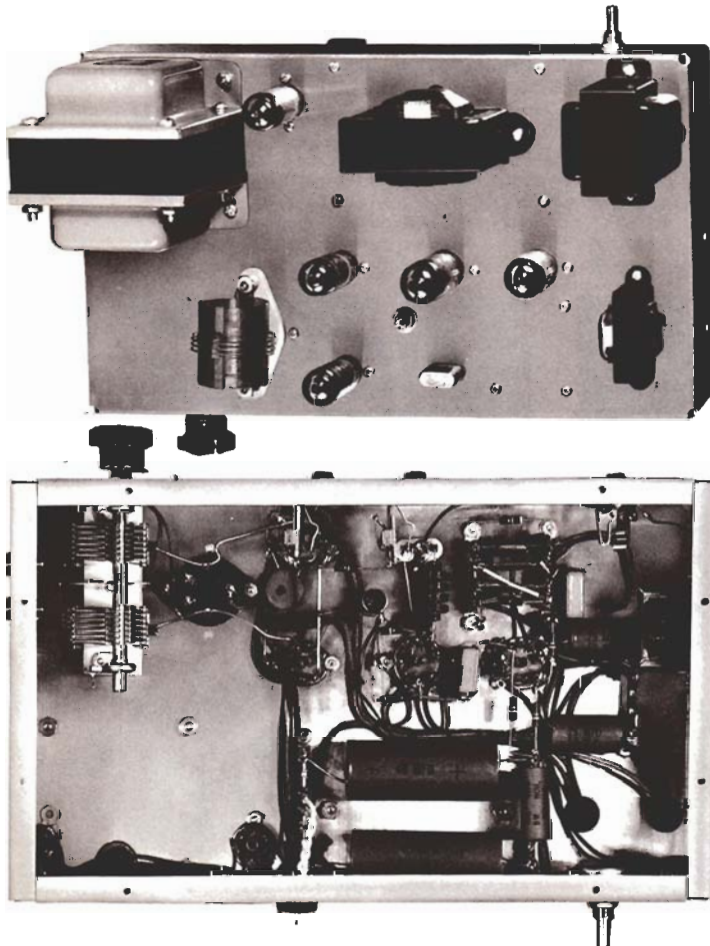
Top view of the double sideband transmitter, showing the locations of major parts on chassis deck. Check to see that sufficient space is provided for components which differ in size and shape from those listed. The audio filter inductor (L_2) and the microphone transformer (T_3) should be oriented in the positions shown to prevent inductive hum pickup from the power transformer (T_1).
